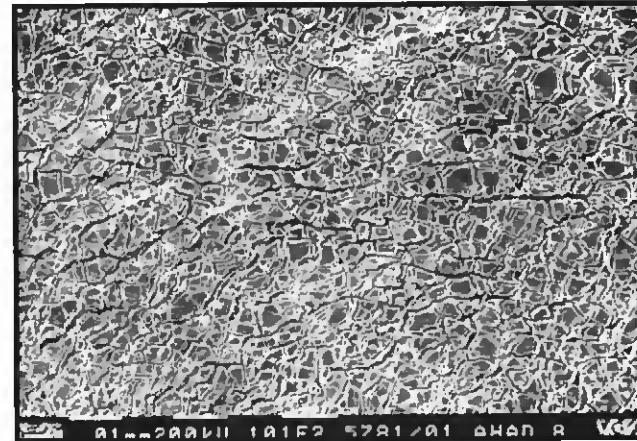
Weld interface surface after fracture, cold roll welding Al-Al with one-sided hard Cr plating (AHAD),  $Y = 0.597$ .
